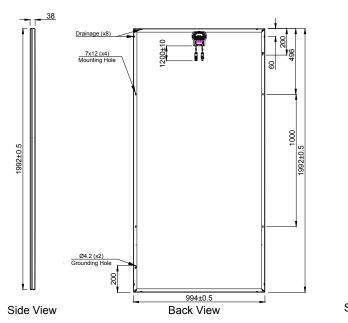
Mechanical drawing of the SIL NL, SIL ML, and SIL HL modules showing the mounting holes, the drainage holes, and the ground connection holes.
